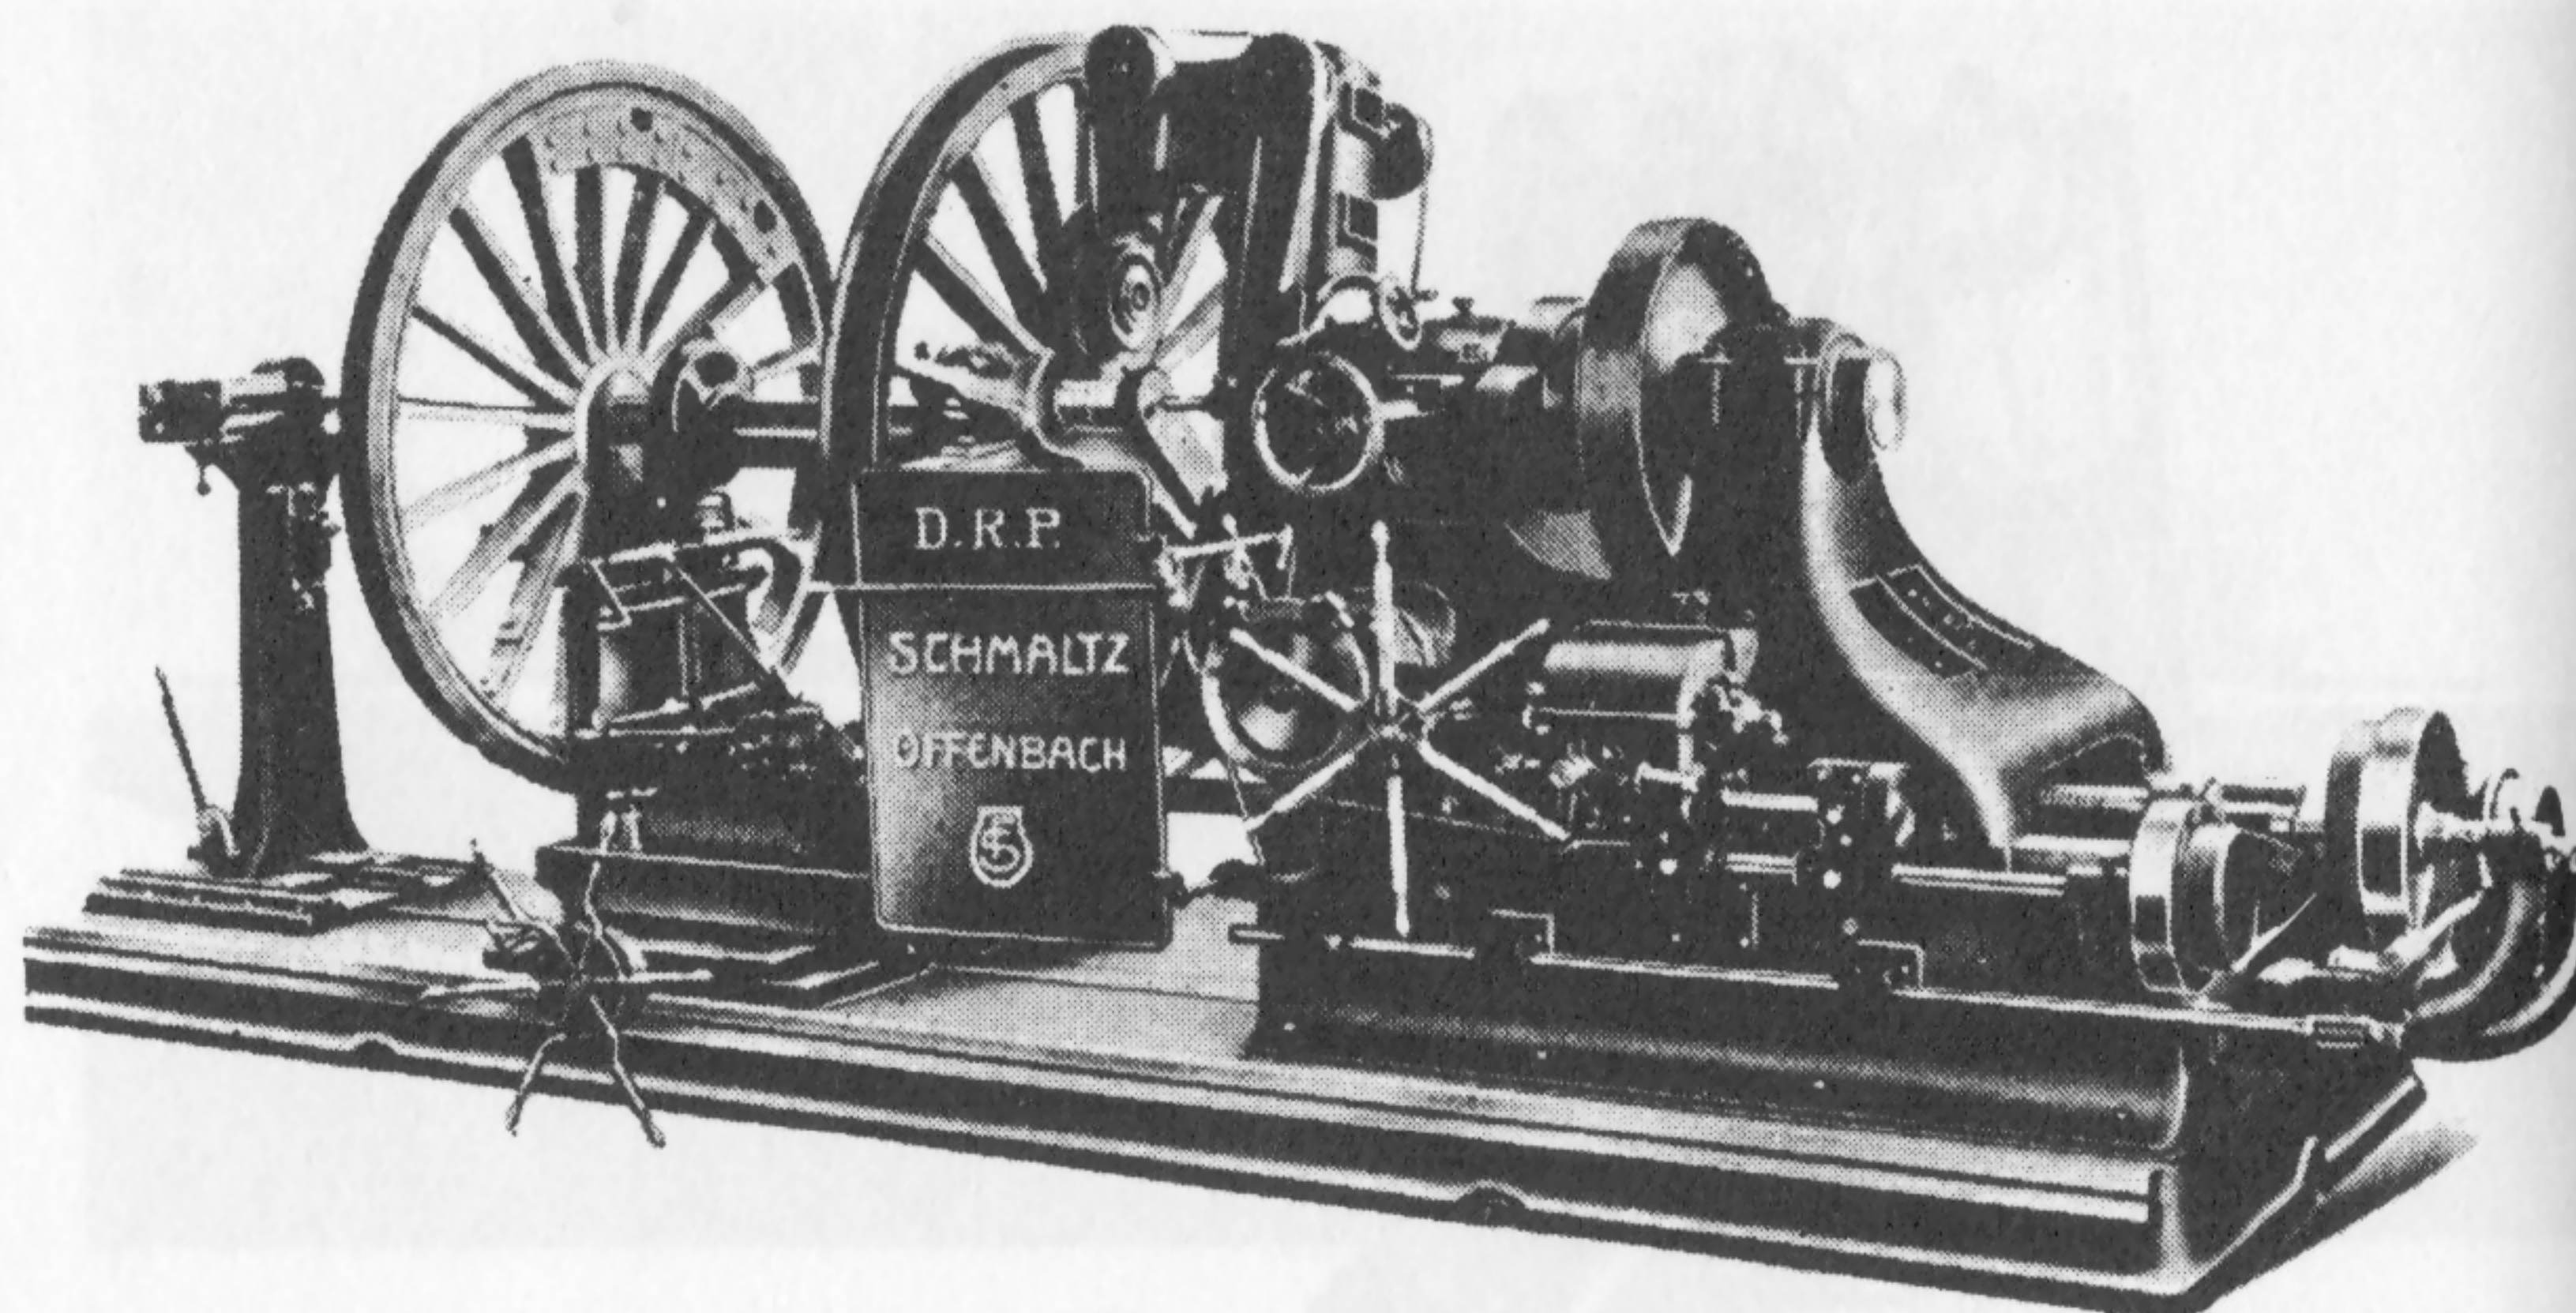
PLANETARY GRINDER FOR LOCOMOTIVE CRANK PINS, 1914 (Halsey)
